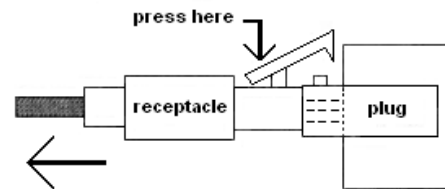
Side view of receptacle-plug removal from the voltage conditioner assembly
